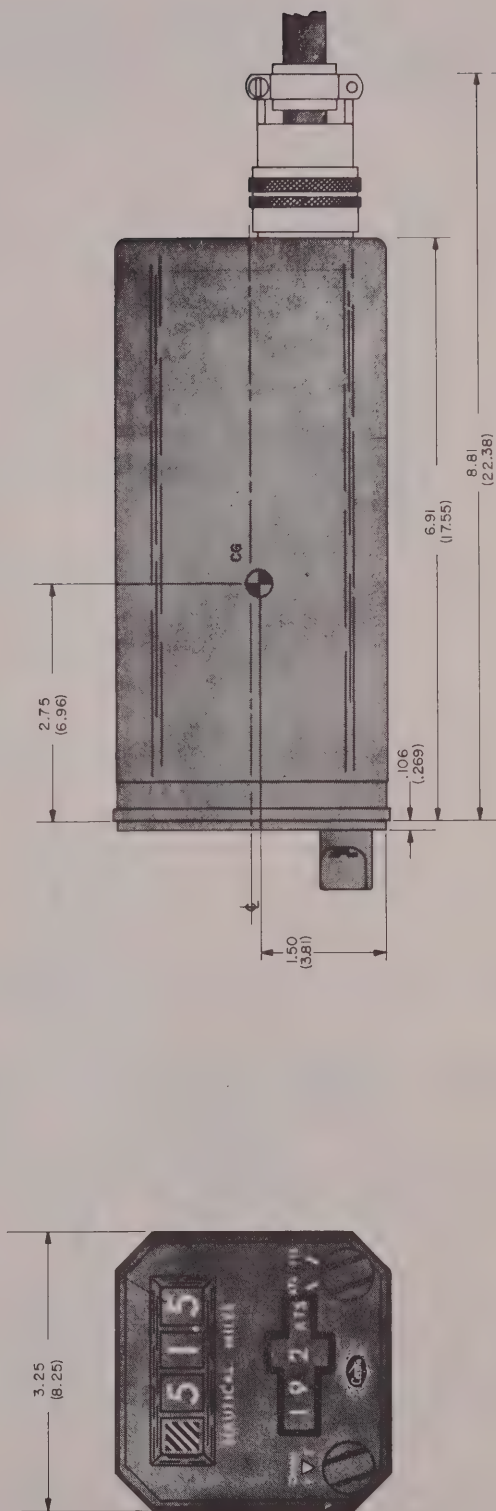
Cessna DME 800 Indicator Installation Drawing
